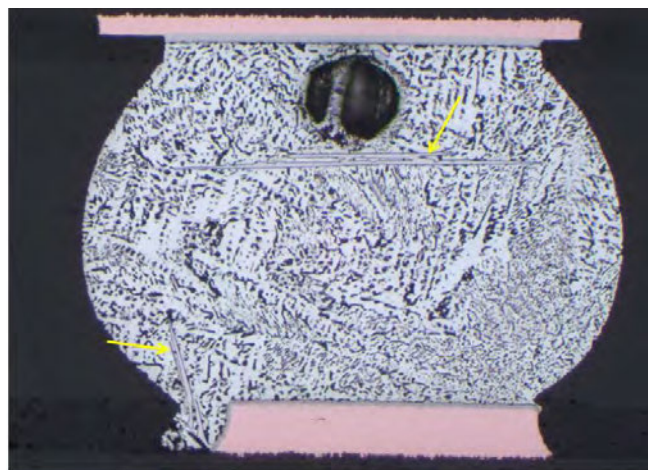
Large Cu6Sn5 IMC structures in a SAC305 solder joint.
